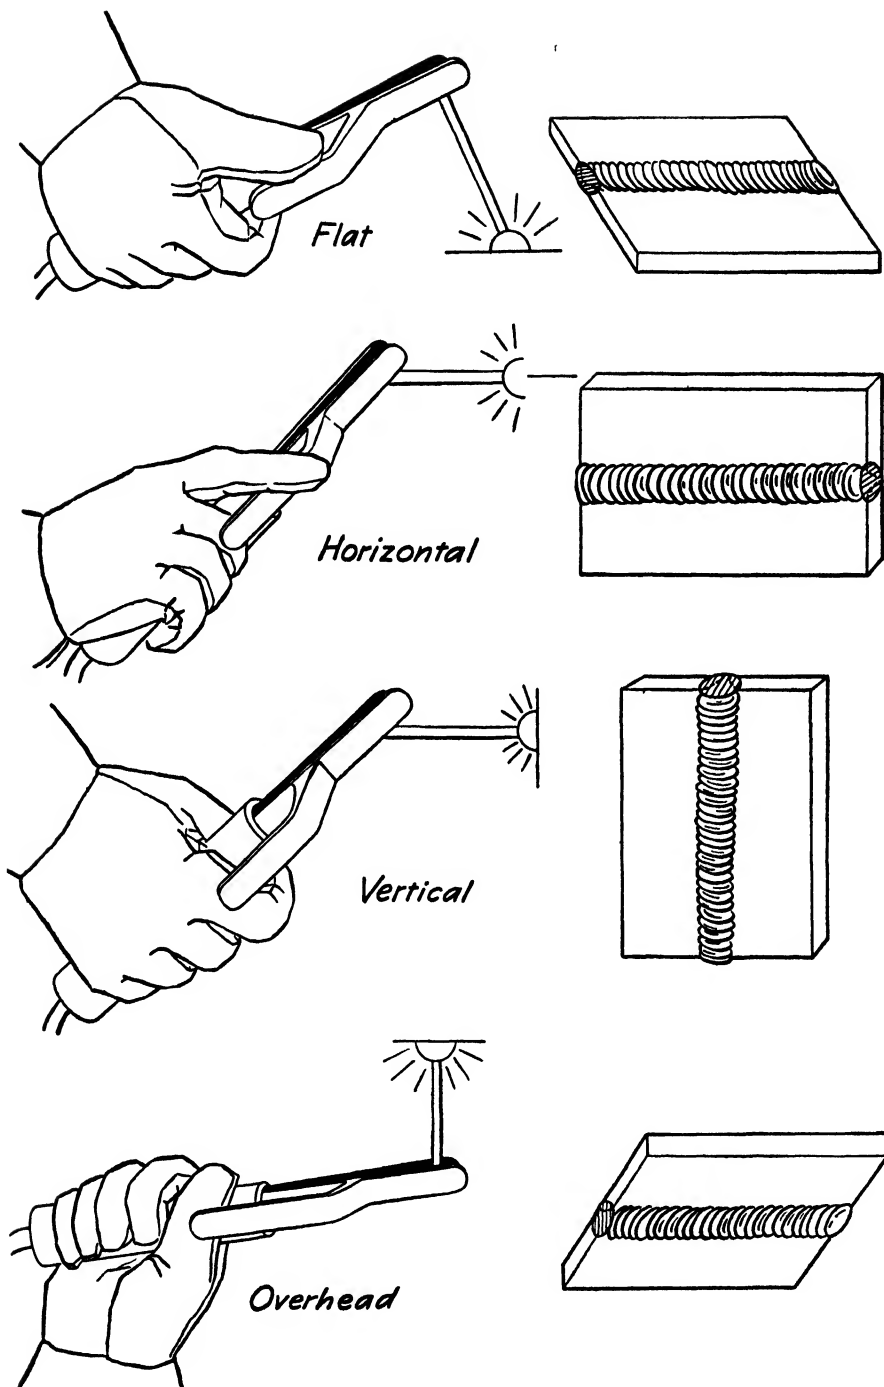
The different welding positions. Welding in various positions is frequently required in farm welding.
